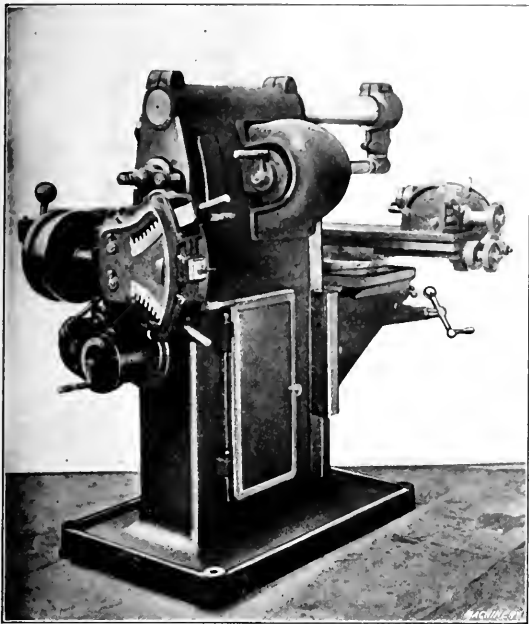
Italian Milling Machine with Combined Speed- and Feed-changing Mechanism
